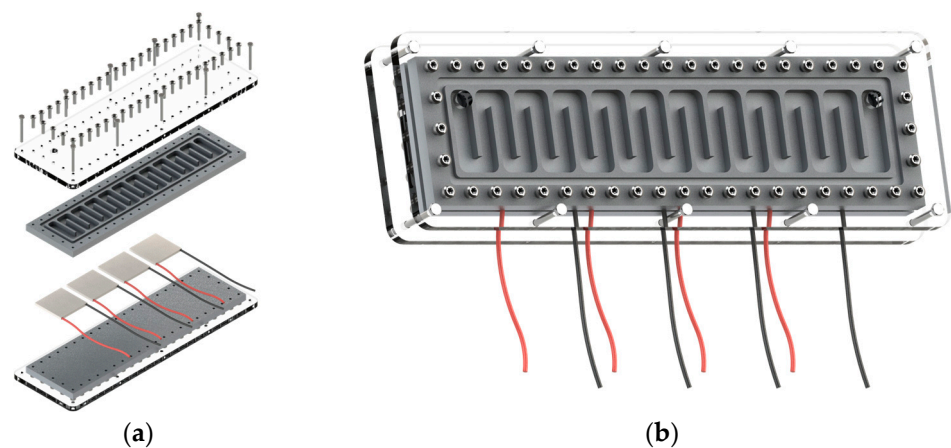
Exploded (a) and assembled (b) view of the TEG HX, showing the four Peltier cells, machined aluminum plates, lids, and fixtures.
